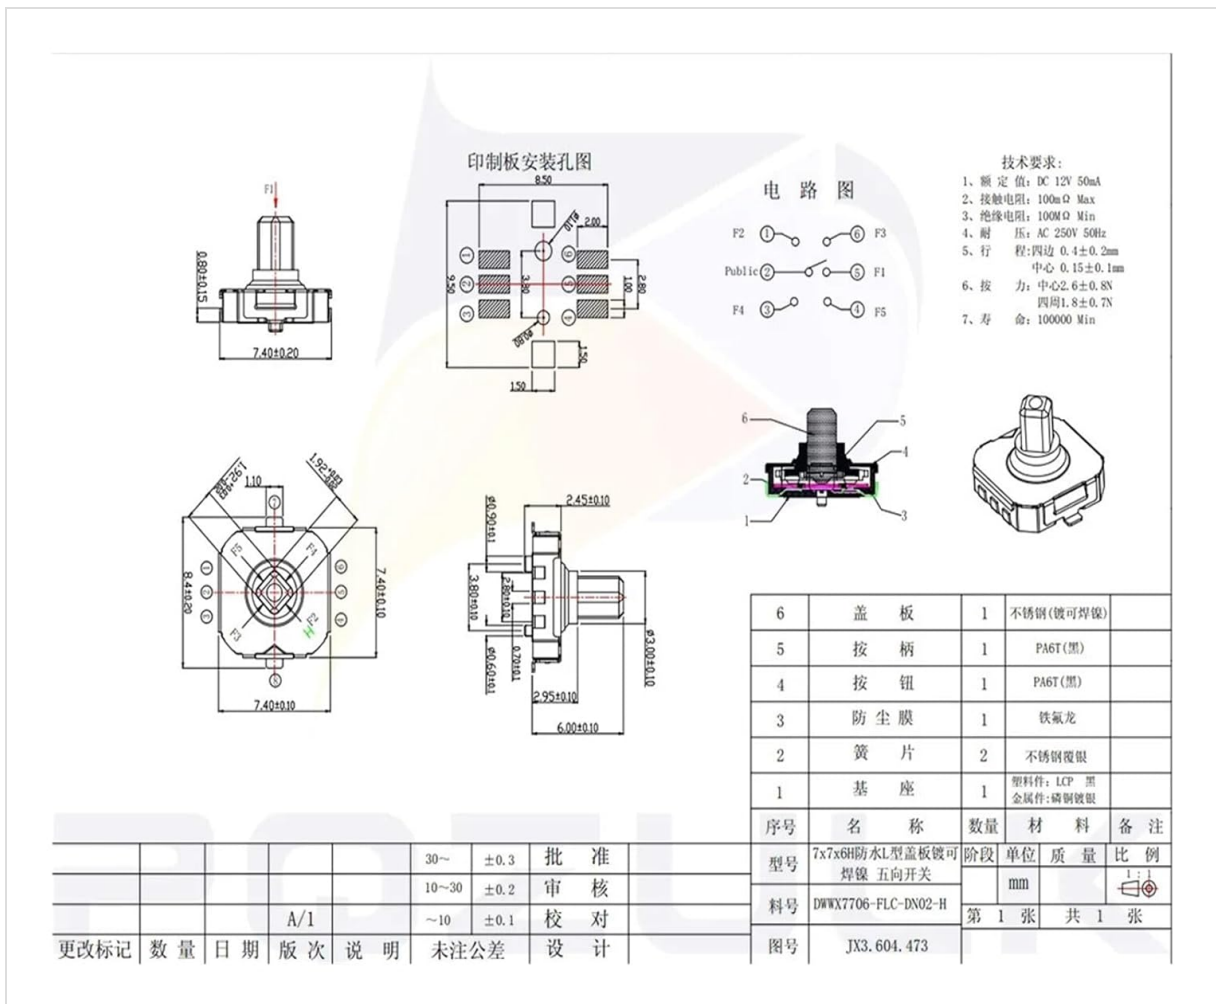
Technical drawing and schematic diagram for the SKRHABE010 switch, detailing its dimensions and electrical connections for PCB integration.
